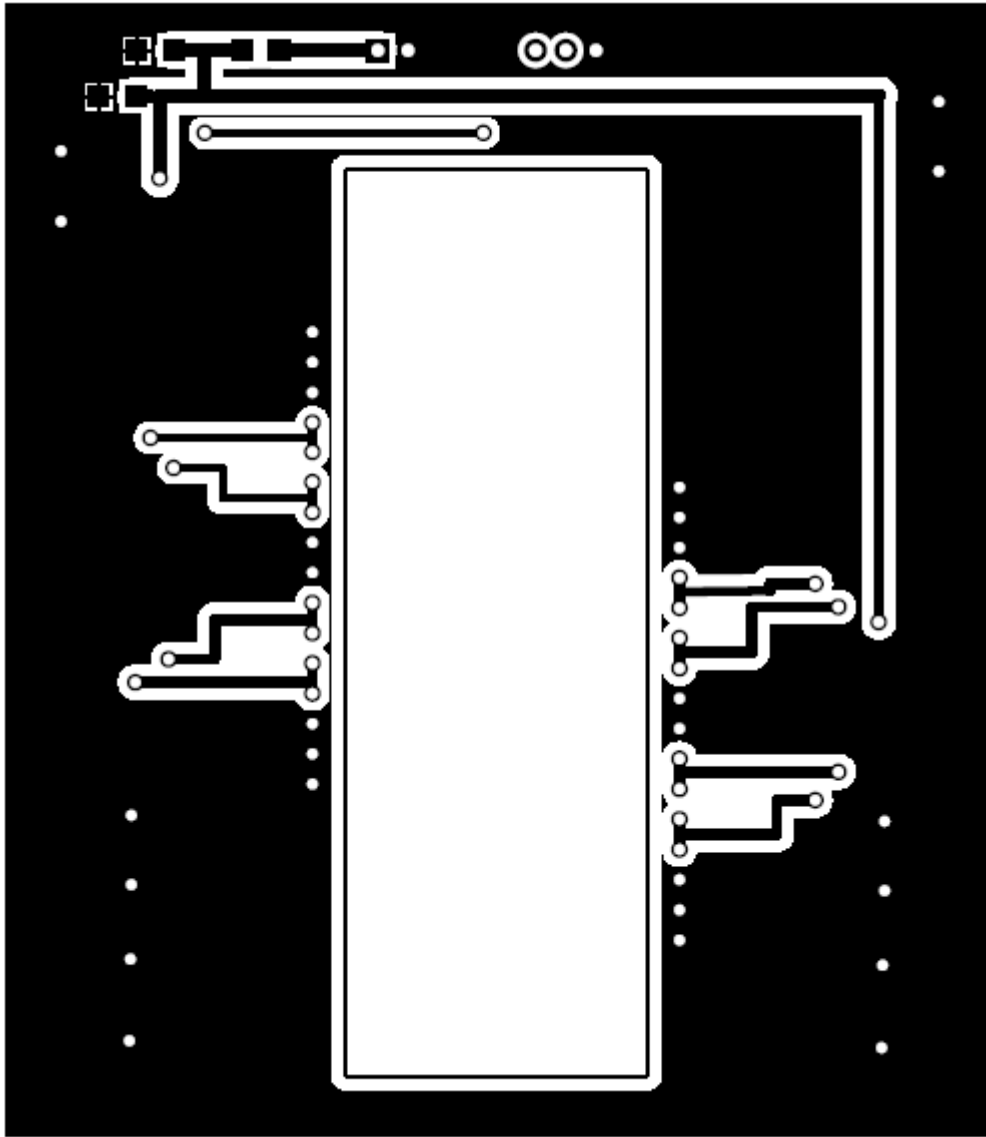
RF switch PCB bottom copper layer (large rectangular central region is a hole).
